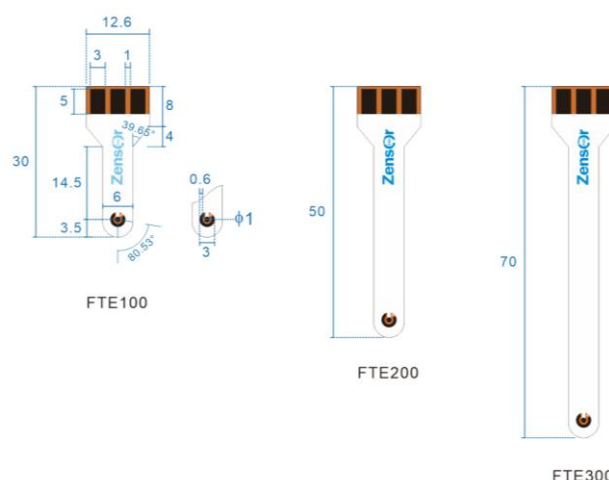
Dimensions of FTE100, FTE200 and FTE300.
